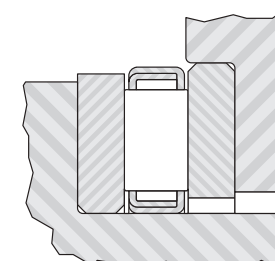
Typical mounting of a thrust bearing when the shaft rotates
